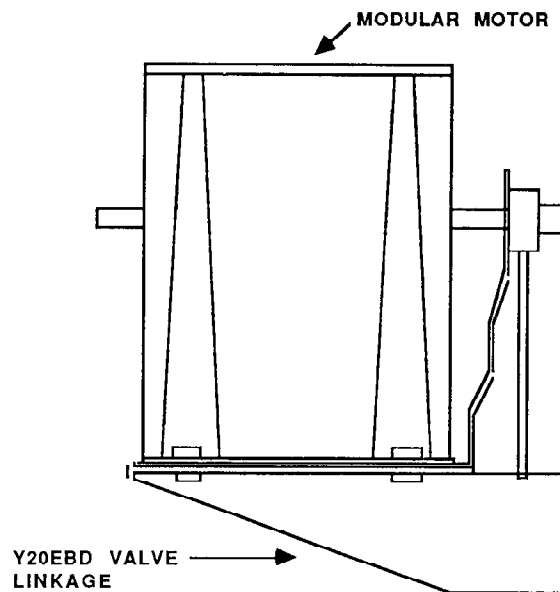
MOUNTING MMR TO JOHNSON Y20EBD VALVE LINKAGE
